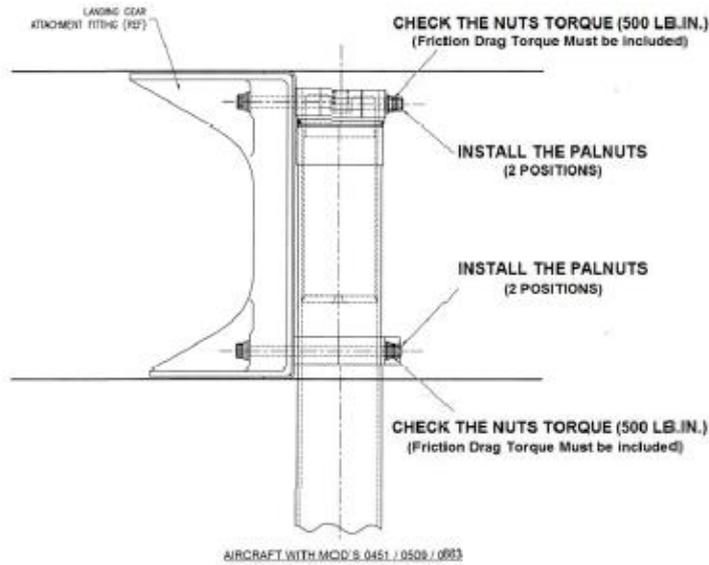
MAIN LANDING GEAR (AIRCRAFT WITH MODS 0451 / 0509 / 0663) – TORQUE CHECK AND PALNUTS INSTALLATION
